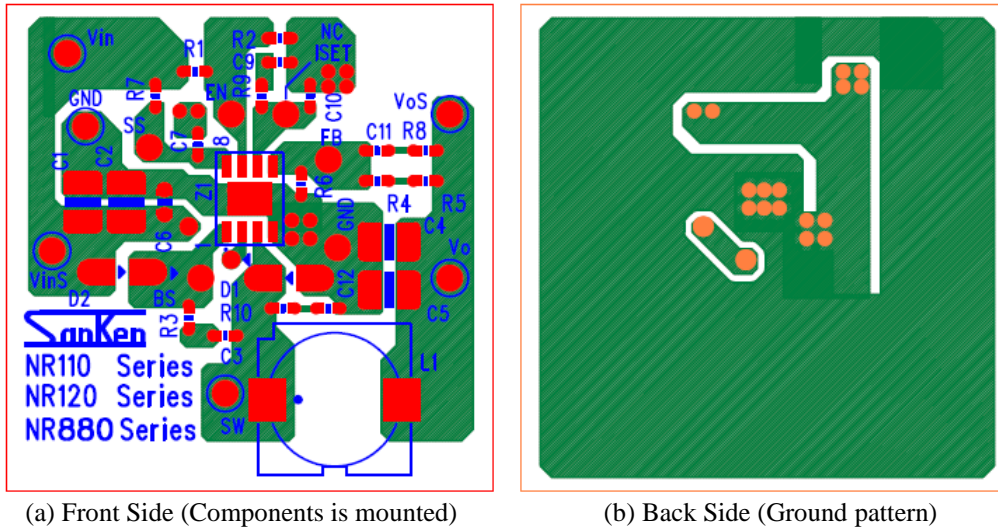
Pattern Layout Example (PCB size: 40 mm x 40 mm)
